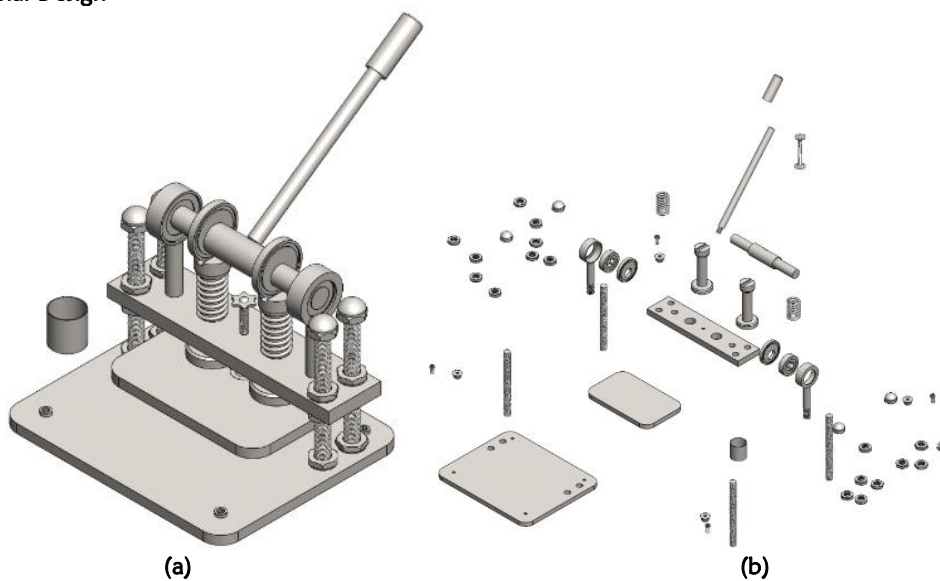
(a) Original Design of Hand Press Machine (b) Exploded View of Original Design
